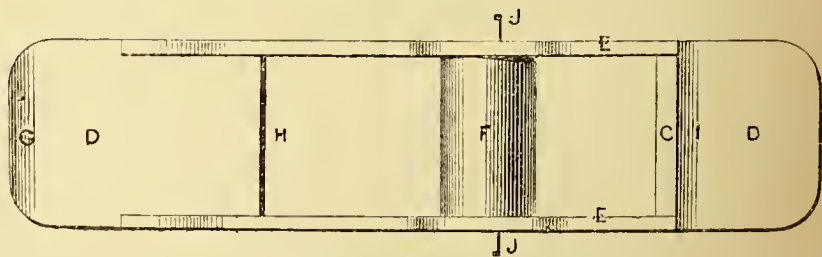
LARGER END SURFACE PLANE.—Plan.
